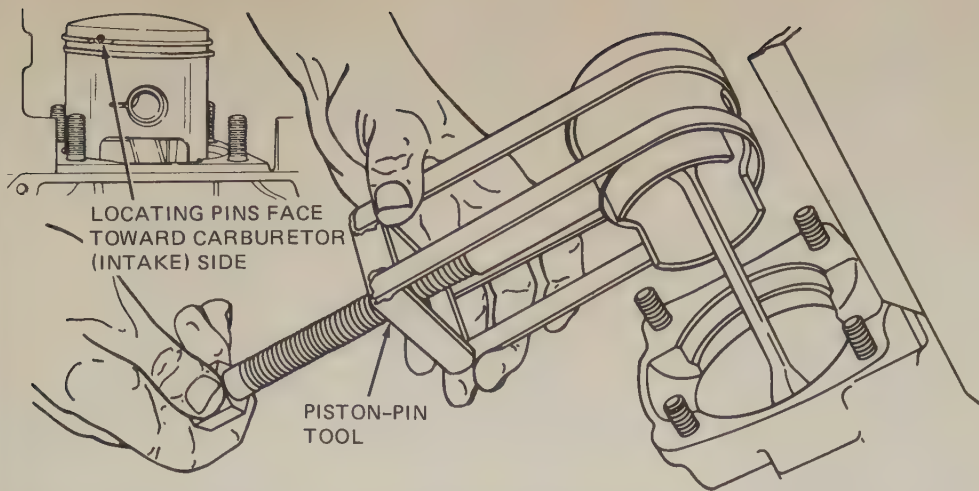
Using a special piston-pin tool to install a piston pin. (Kohler Company)
